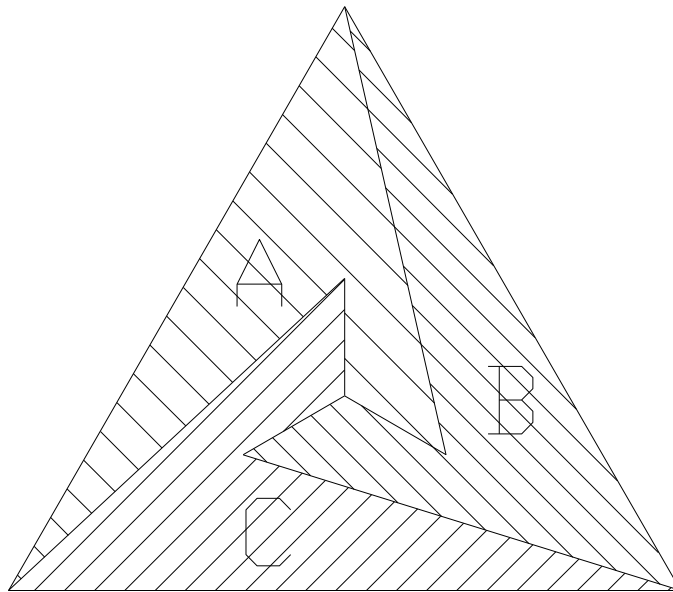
A product that can be assembled with a C-NS-L-M assembly
